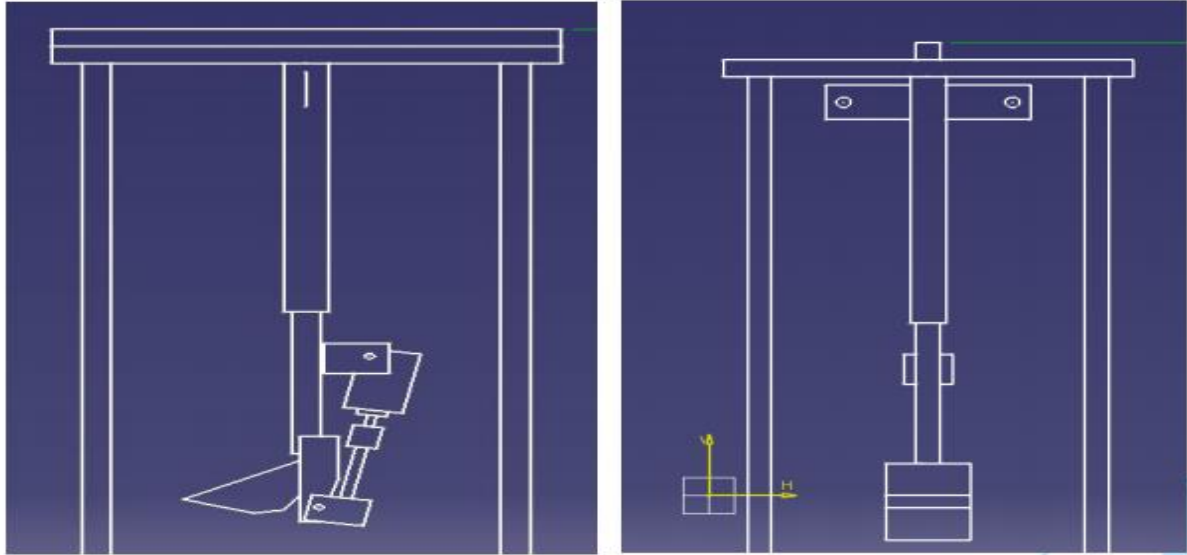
AutoCAD Design of the Manhole Clog Removal Machine
